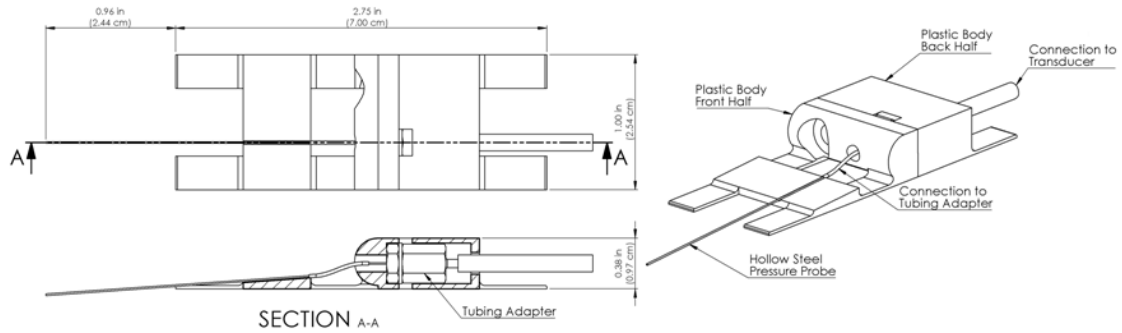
Multi-View Representation of the Preston Tube Mount and Assembly Design.
